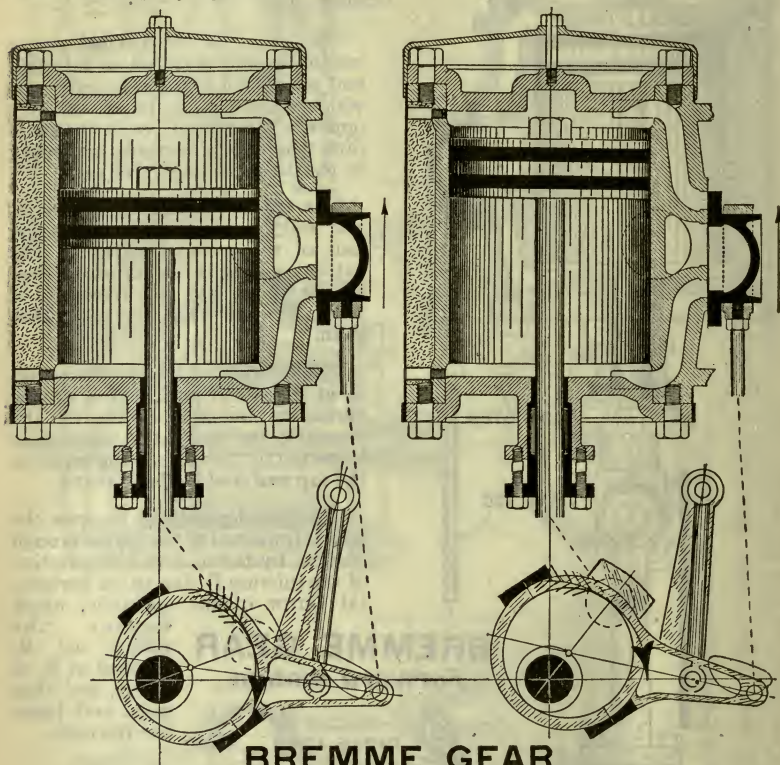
Bremme gear, or second modification of the Hackworth gear.
